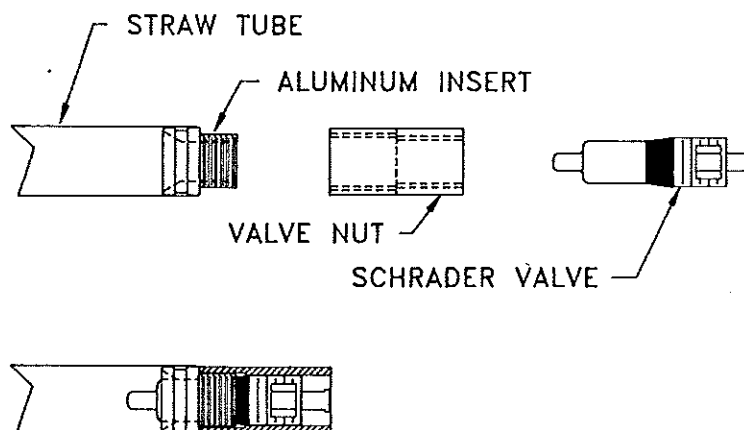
The temporary end-plug assembly. The brass collar containing a bicycle-tire valve is screwed onto the threads of the aluminum insert so the straw tube can be pressurized for gluing in the straw-tube bundle. Later the brass collar is removed, and the threaded region of the insert engages the alignment hole on the aluminum end plate.
